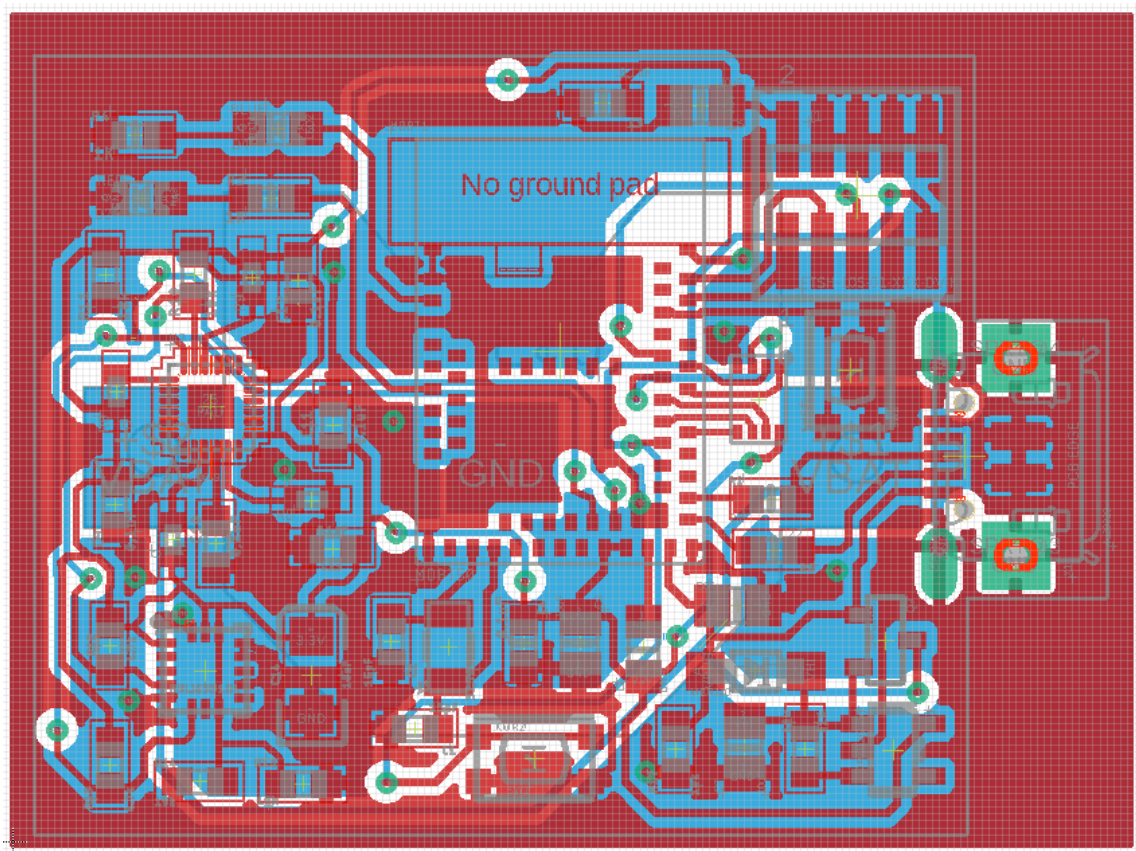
PCB layout of the final prototype design with micro USB and Debugging pins
